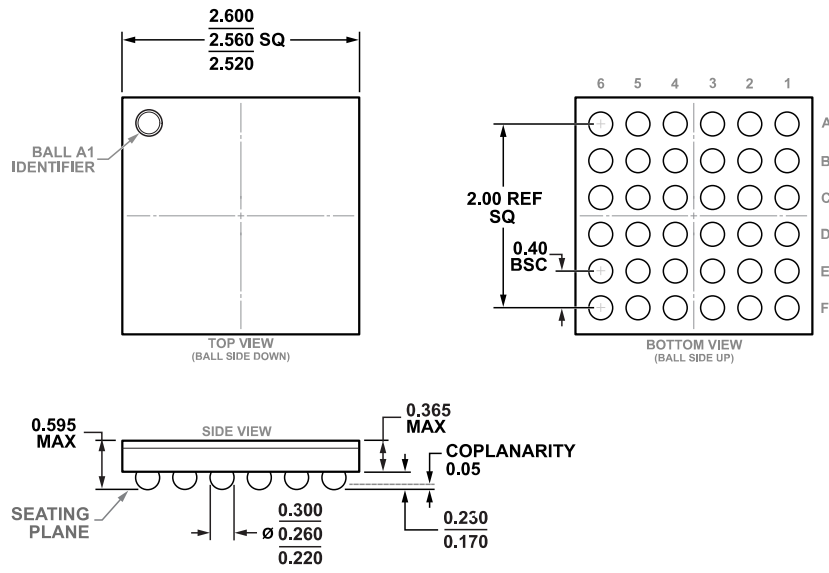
36-Ball Wafer Level Chip Scale Package [WLCSP] with Backside Coating (CB-36-10)
